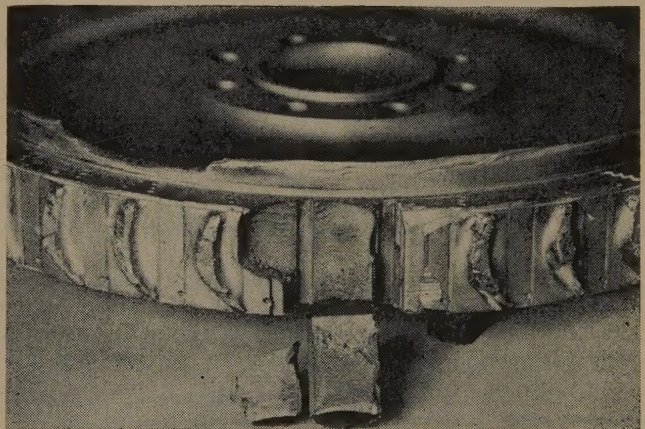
COLD-WORKED 19-9-DL DISK FAILURE SHOWING FRACTURE IN BLADE ROOT FASTENING
